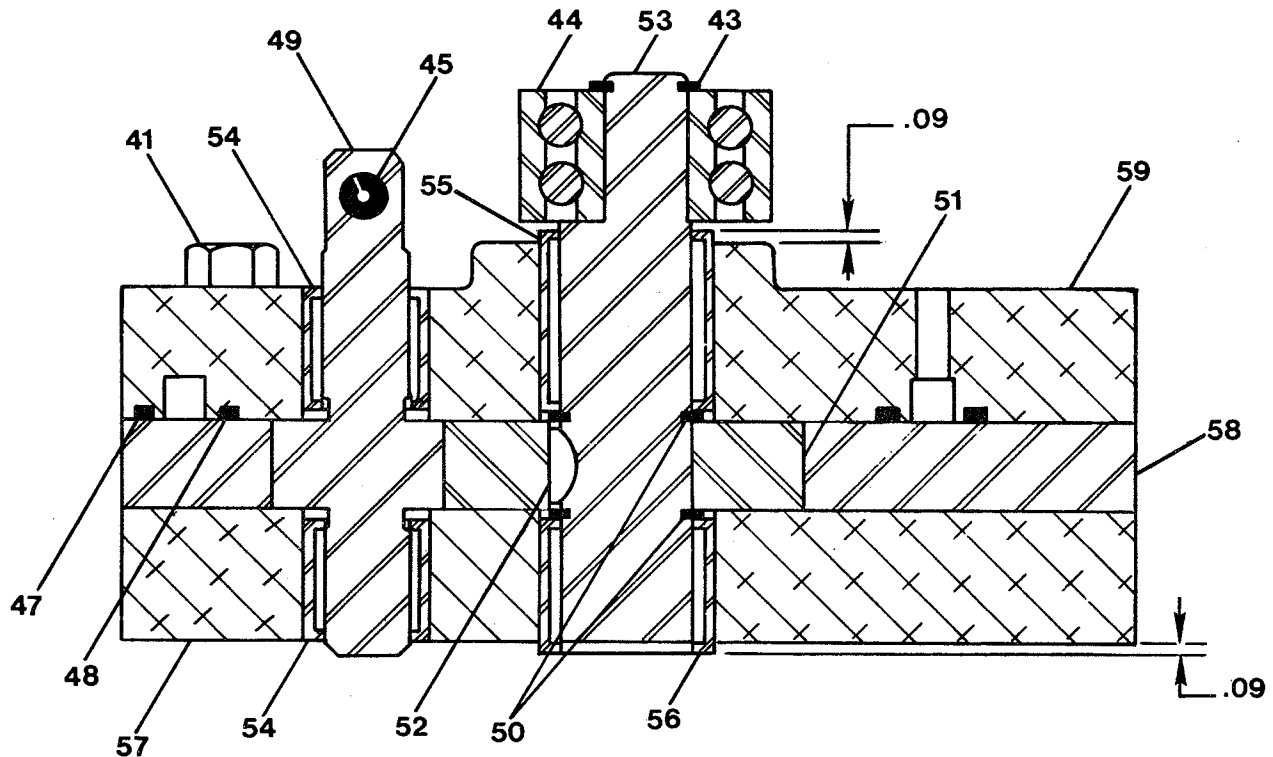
CUTAWAY VIEW OF LOW PRESSURE PUMP
